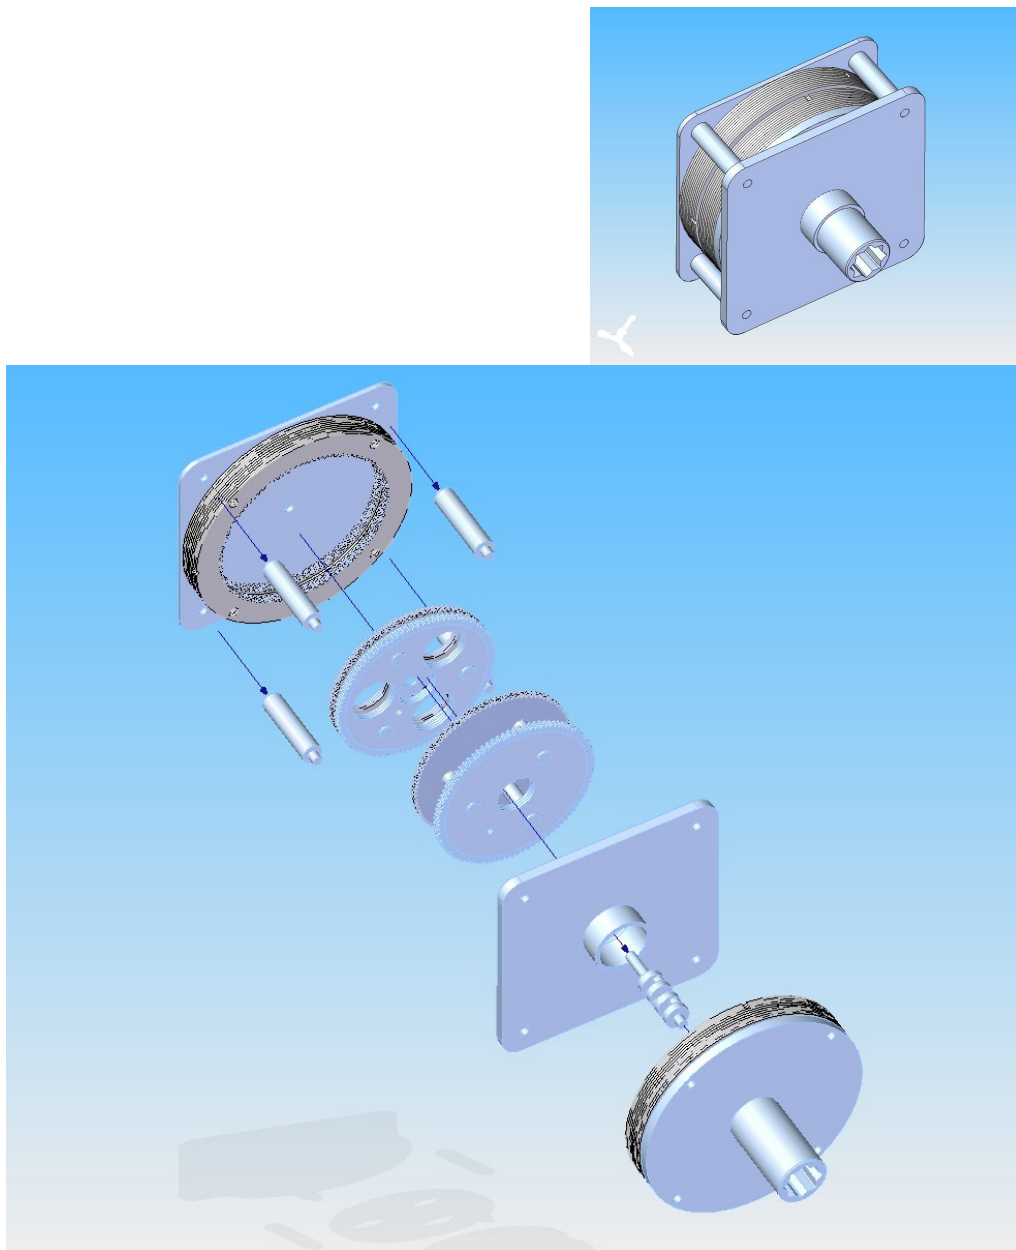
Expanded view of the $\frac{1}{4}$ -turn Actuator.
